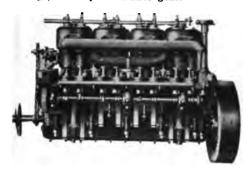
American 34 ton truck. Left side of motor, left side of crank box removed. The cam shaft can be removed by itself, or the rods may be disconnected and the crank shaft may be removed, or the crank-shaft, rods and pistons may be removed without disturbing the cam-shaft, thus making motor part accessibility ideal. All gears are cased in, splash lubricated. The fan, 22 insa diameter, is on the crank-shaft, and the water pump is chain driven.
